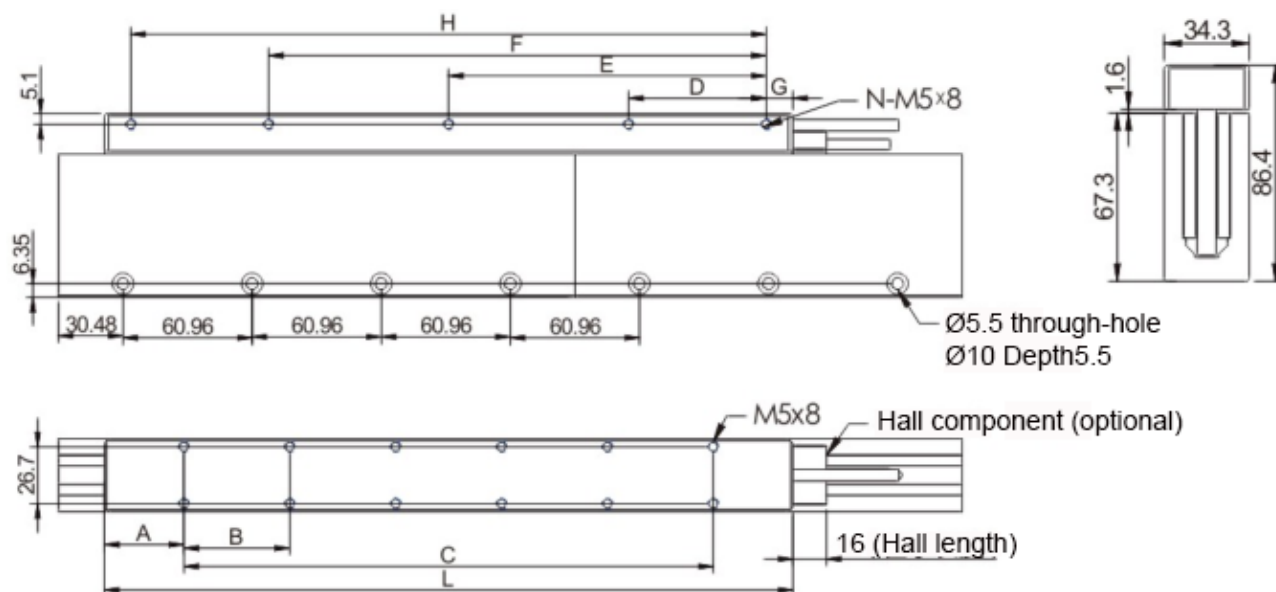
Outline dimensional drawing of WZCR-U50 series
